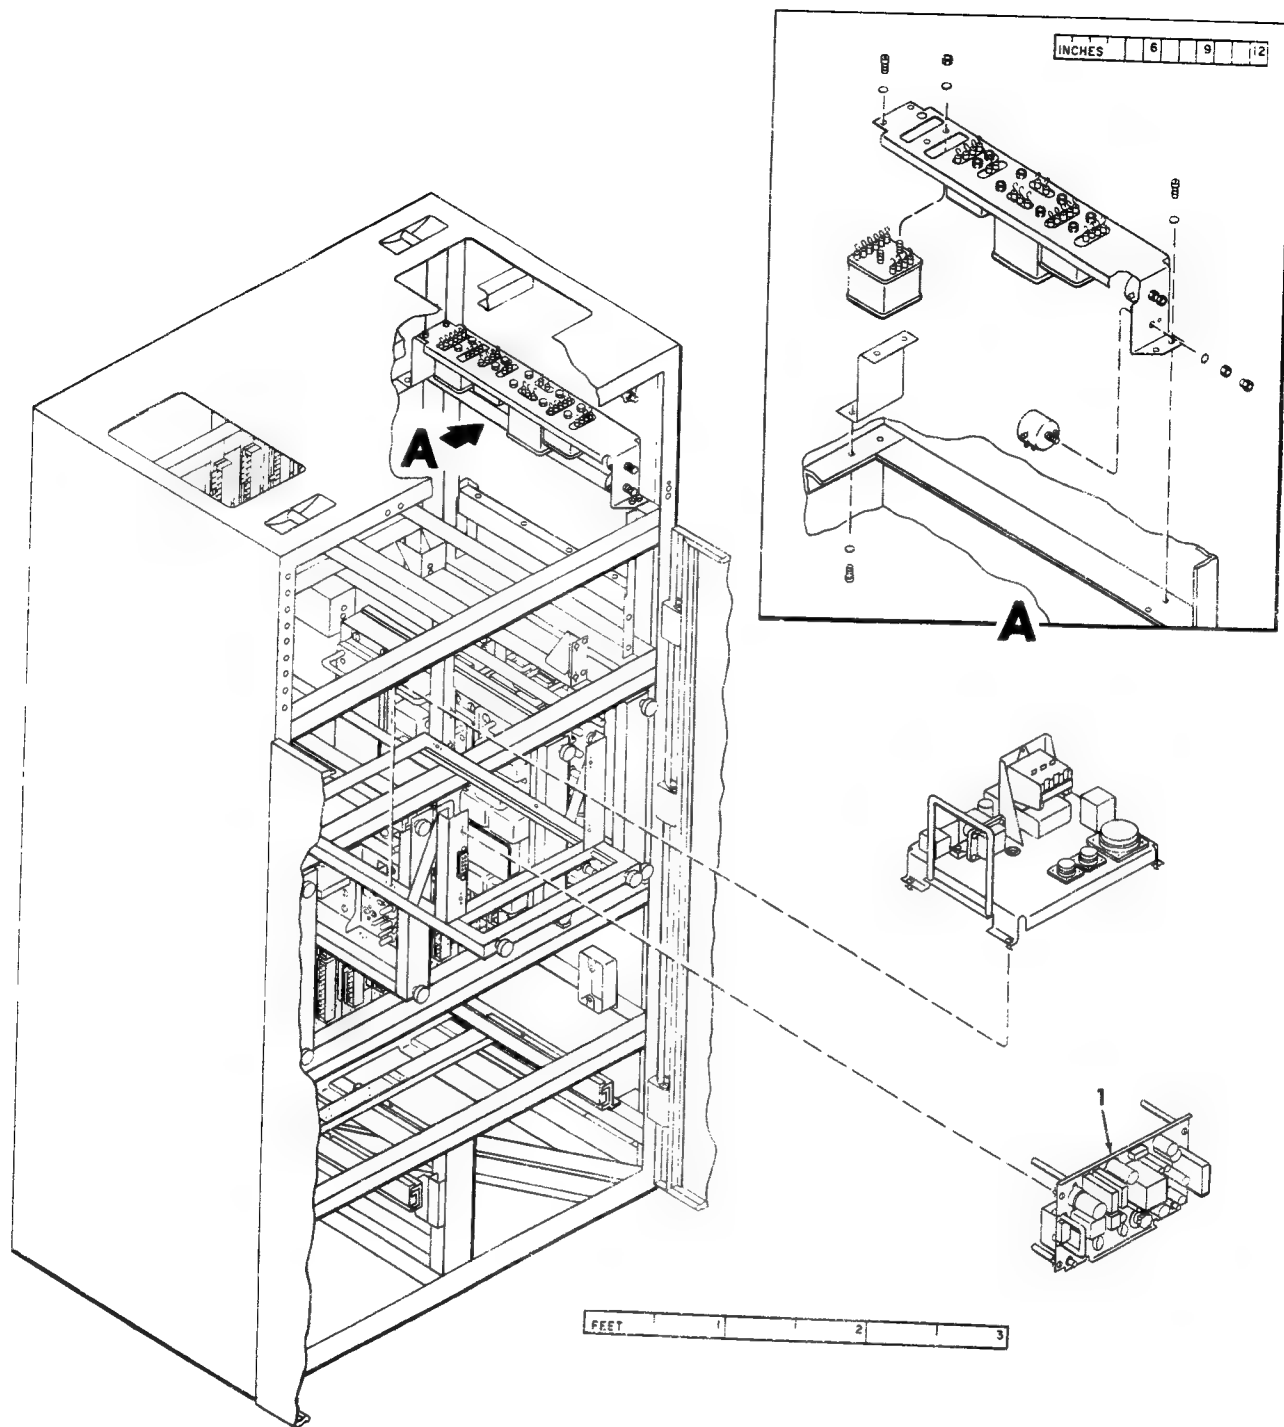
Control, receiver-transmitter (9141310)—partial exploded view
